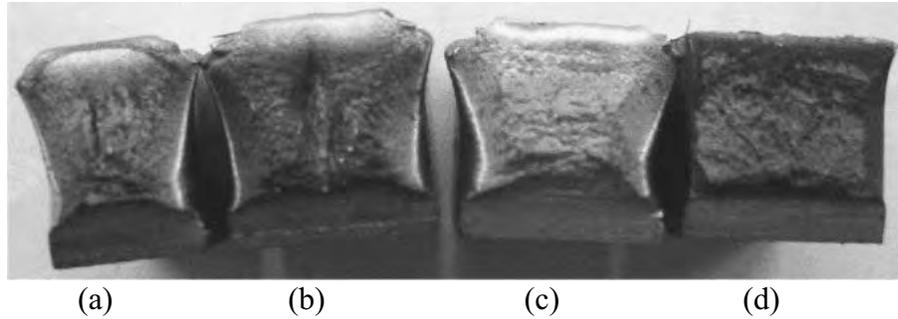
Fracture surfaces of impact shown schematically:
